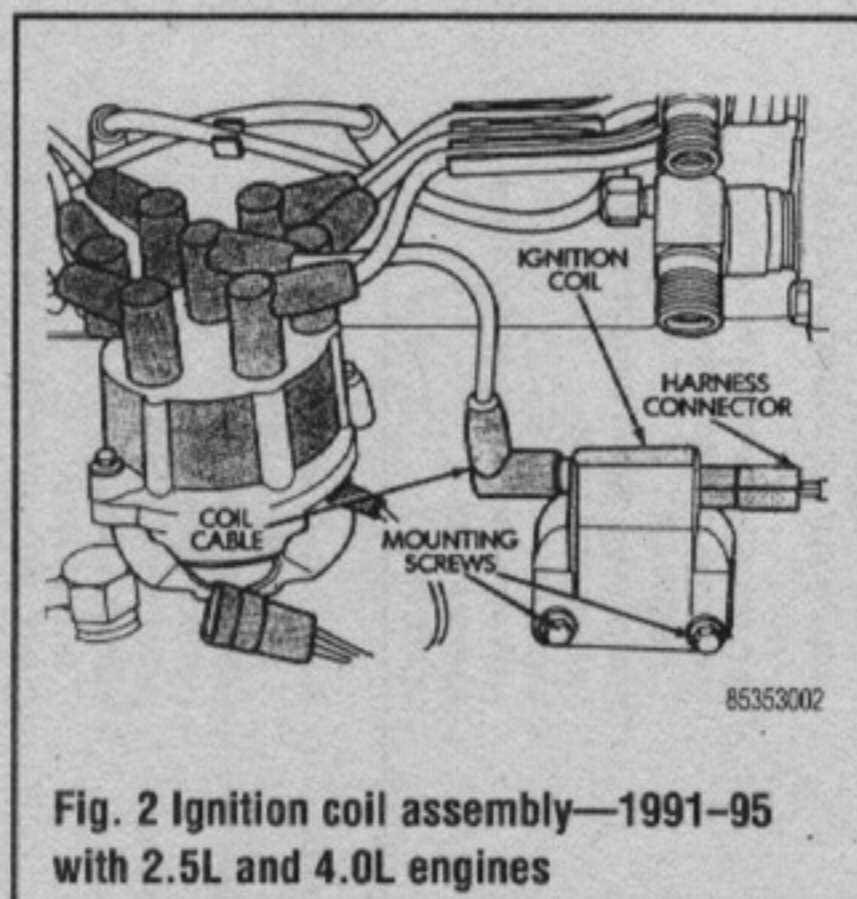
Ignition coil assembly—1991-95 with 2.5L and 4.0L engines
